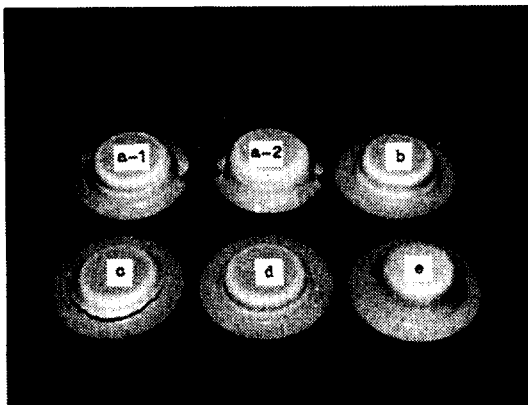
A photograph of cups drawn with 2.5mm thick and 7mm diameter blanks at different blankholder force: (a) without blankholder force, (b) with 50 lbs. blankholder force, (c) with 300 lbs. blankholder force, (d) with constant blankholder position, (e) with lubricating film between blank and blankholder or die at 50 lbs. blankholder force.
